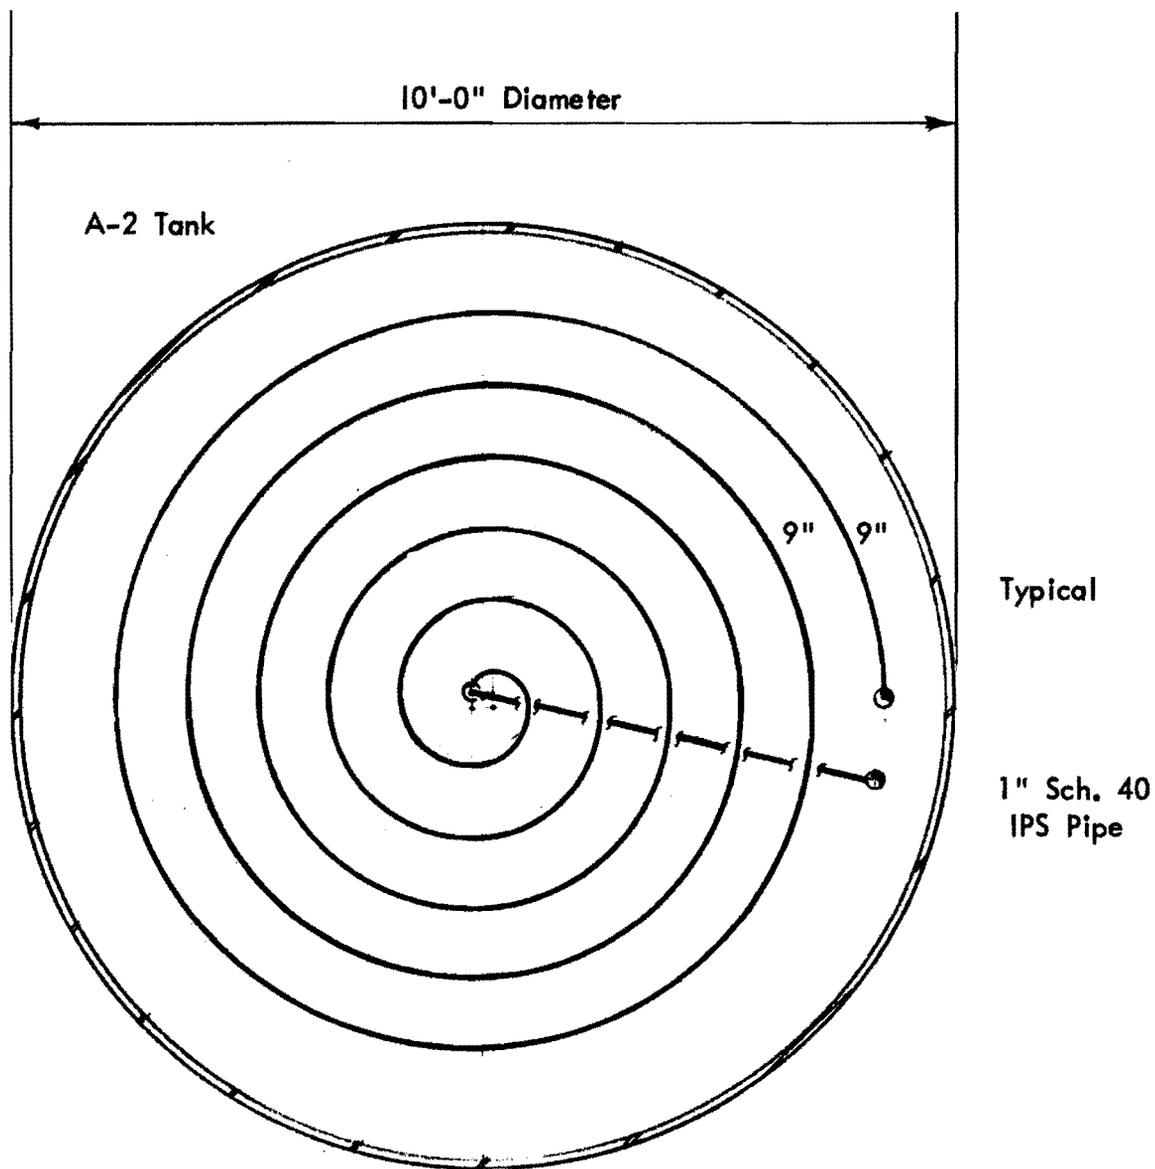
Steam Coil Foam Breaker for Evaporator.
